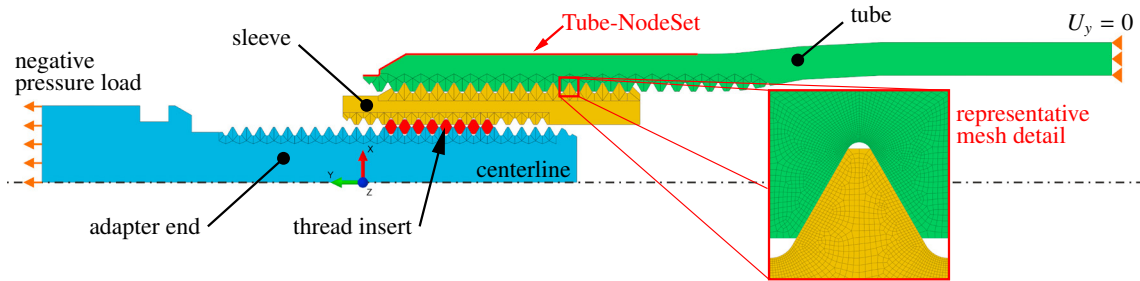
Two dimensional Finite Element model with representative mesh detail of thread roots
